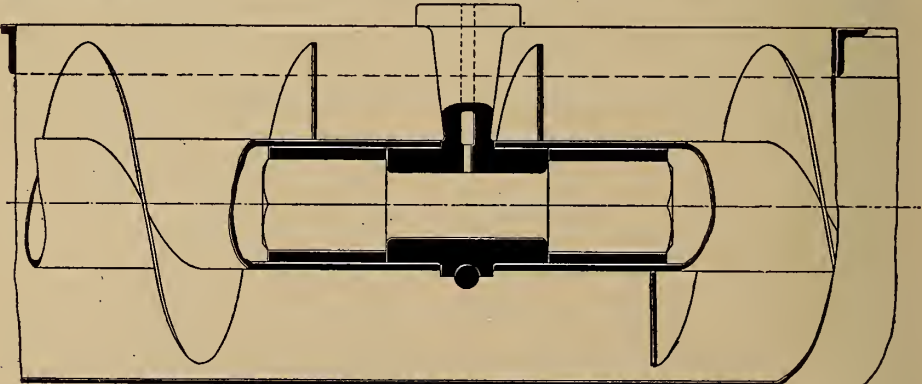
A.—LONGITUDINAL SECTION OF WORM CONVEYOR BEARING
